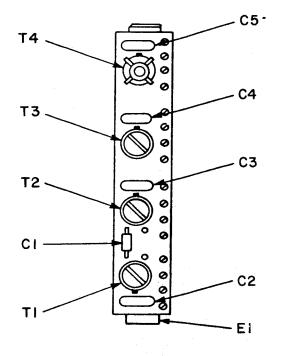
9 MHz Subassembly A2A4A27, Component Locations
